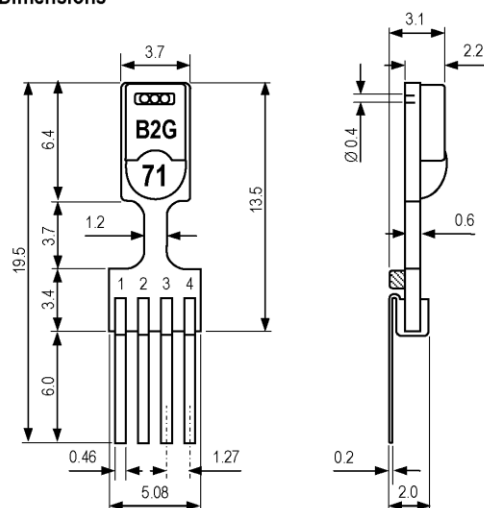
Drawing of SHT7x (applies to SHT71 and SHT75) sensor packaging, dimensions in mm (1mm = 0.039inch). Contact assignment: 1: SCK, 2: VDD, 3: GND, 4: DATA. Hatched item on backside of PCB is a 100nF capacitor – see Section 2.1 for more information.
